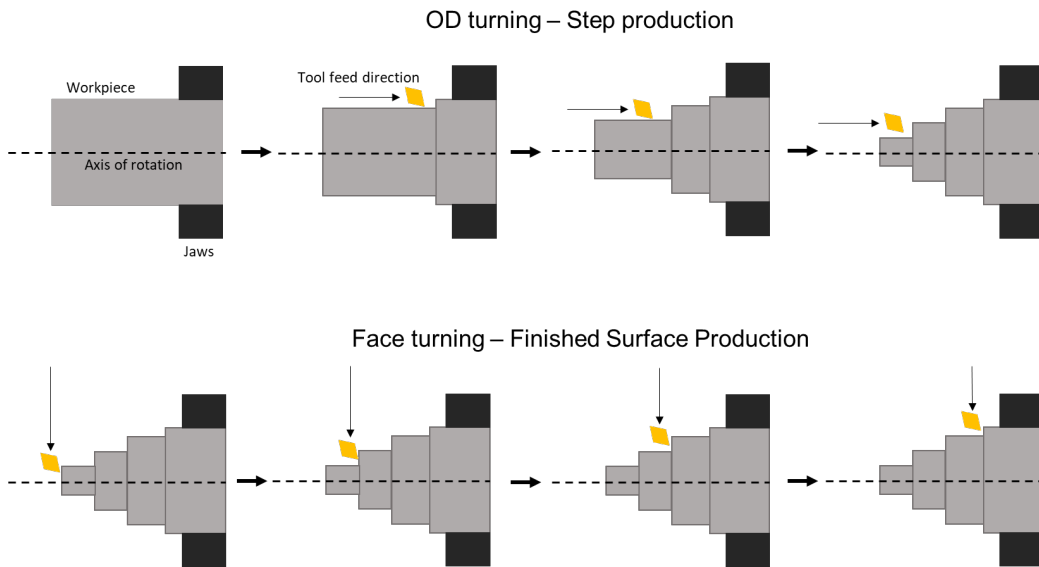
Diagram showing the process of producing the stepped geometry on each as forged billet using OD turning, followed by the finish face turning passes.
